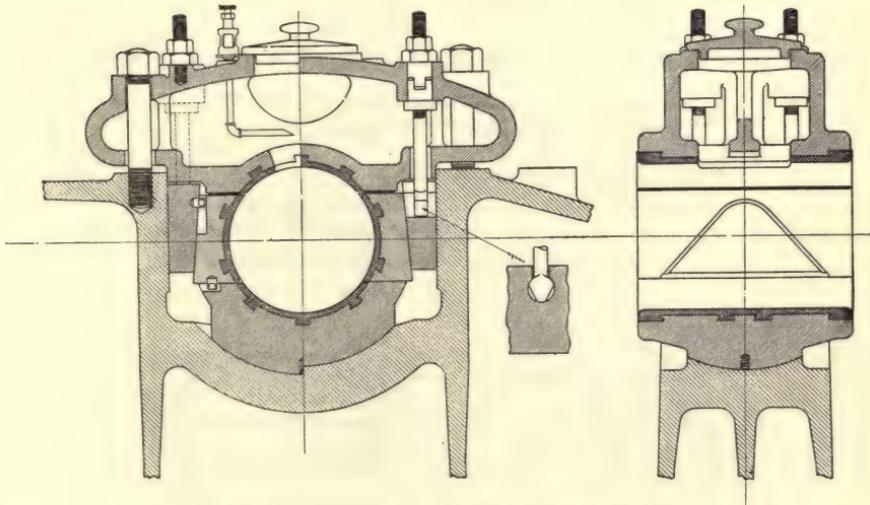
Allis-Chalmers Diesel engine bearing.
